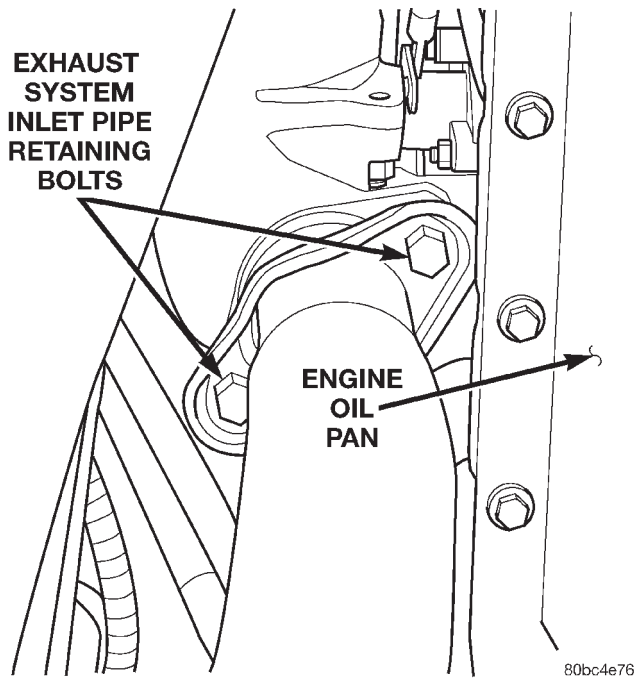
Exhaust System Inlet Pipe Retaining Bolts
